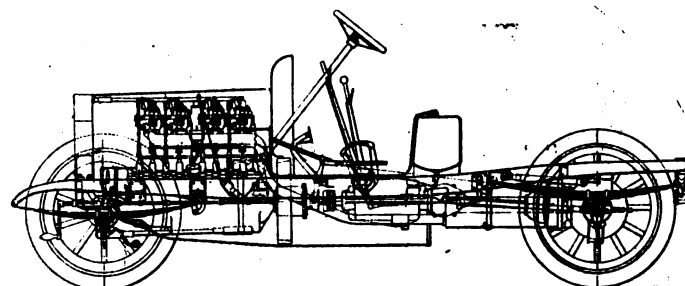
Elevation of chassis of the 24-30-h.p. New Arrol-Johnston Car.
